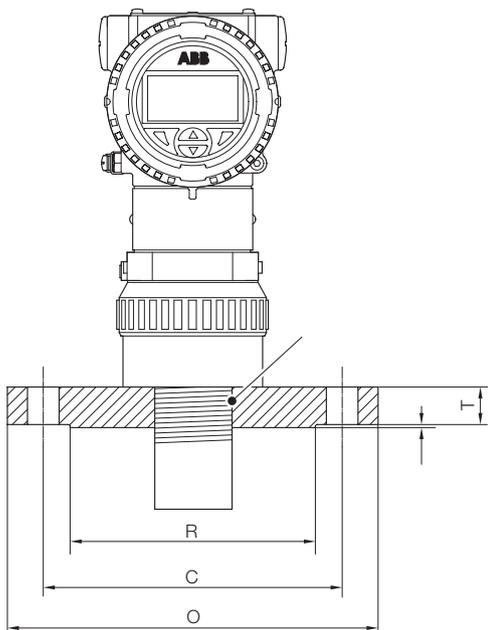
Mounting with ANSI B16.5 flange with 1.5" and 2" NPT thread
